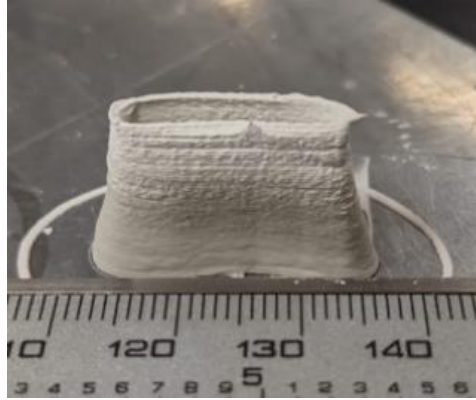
Improved Surface Quality 3D Printed Mold Specimen
